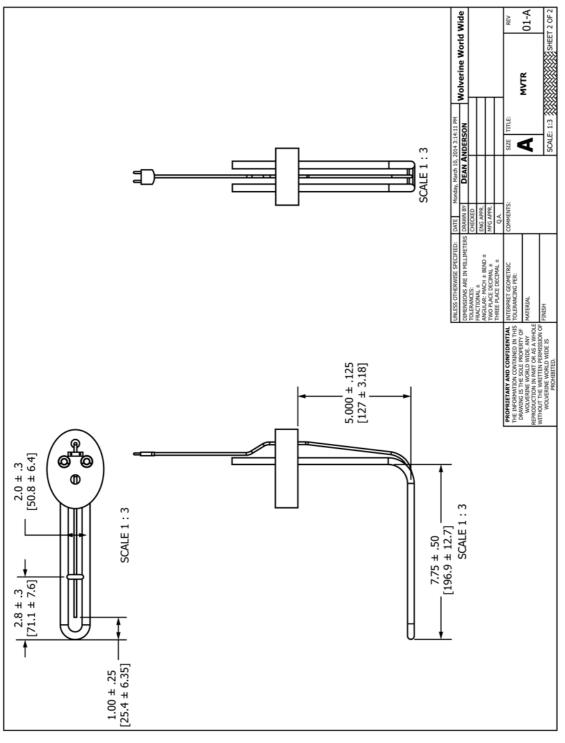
Dimensions for Diameter, Horizontal and Vertical Tubing Lengths
